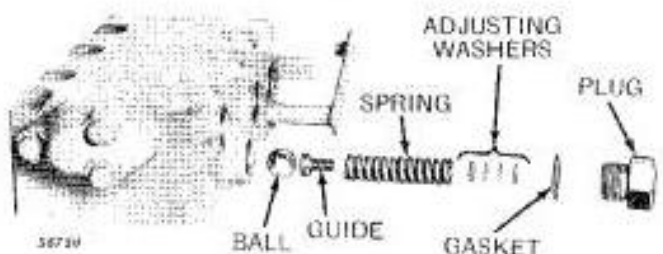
Location of Adjusting Washers in Single Remote Cylinder Valve Housing Relief Valve
